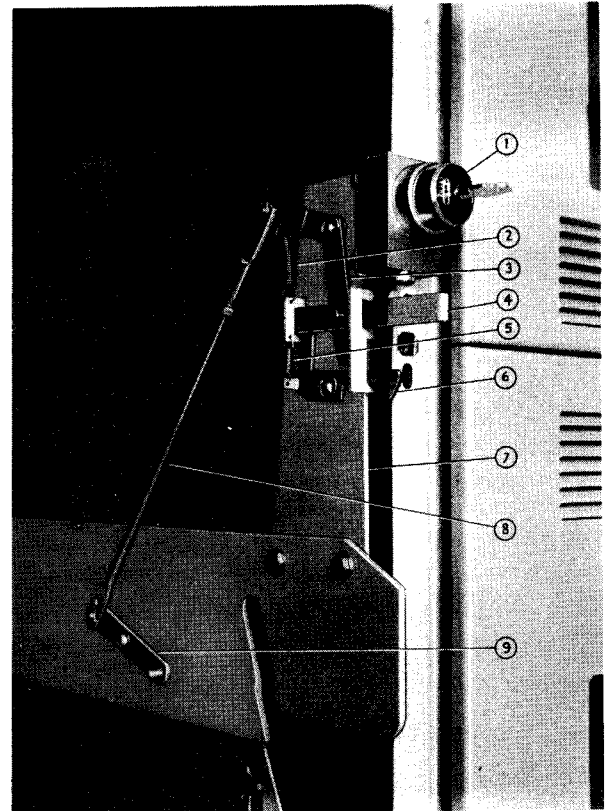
Key interlock mechanism for K-Line drawout circuit breaker.
